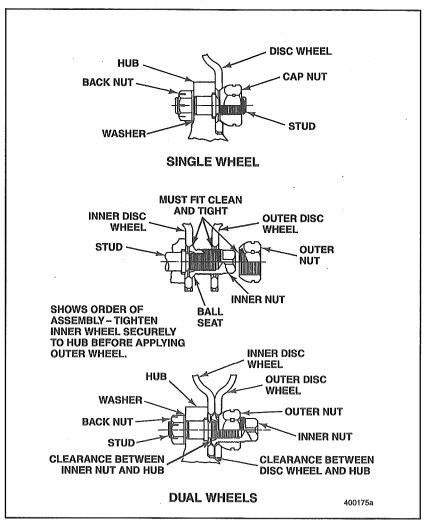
Disc Wheel Assembly (Stud Piloted Ball Seat)
